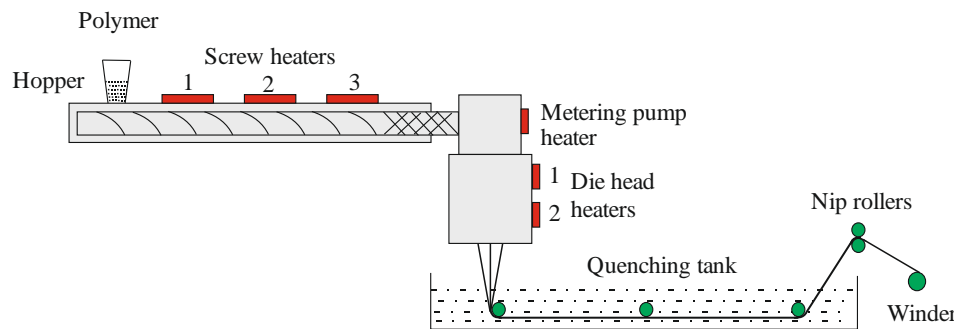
Schematic diagram of the bench top screw extrusion machine
